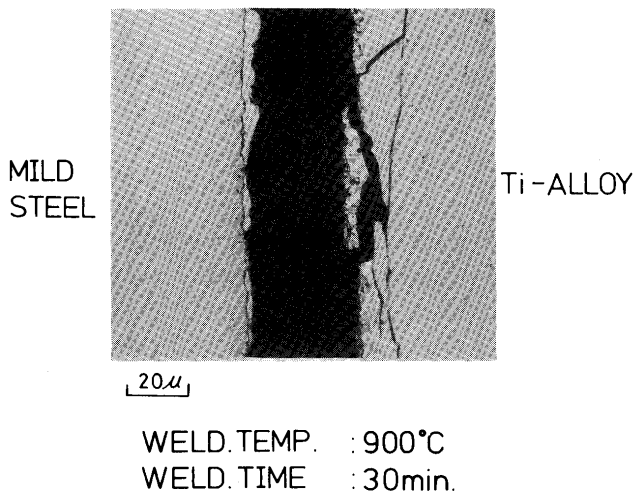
Cross sectional microstructures for the fractured zone obtained from the joint welded without insertmetal.
